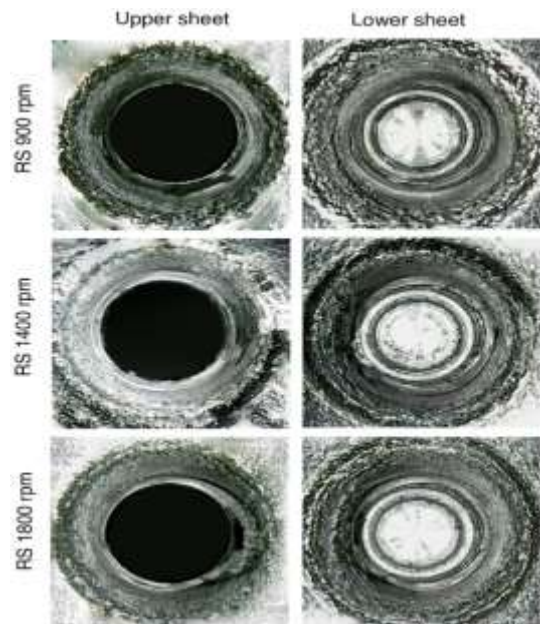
Fracture surfaces of FSSW joints under shear load using a step pin at different RS
